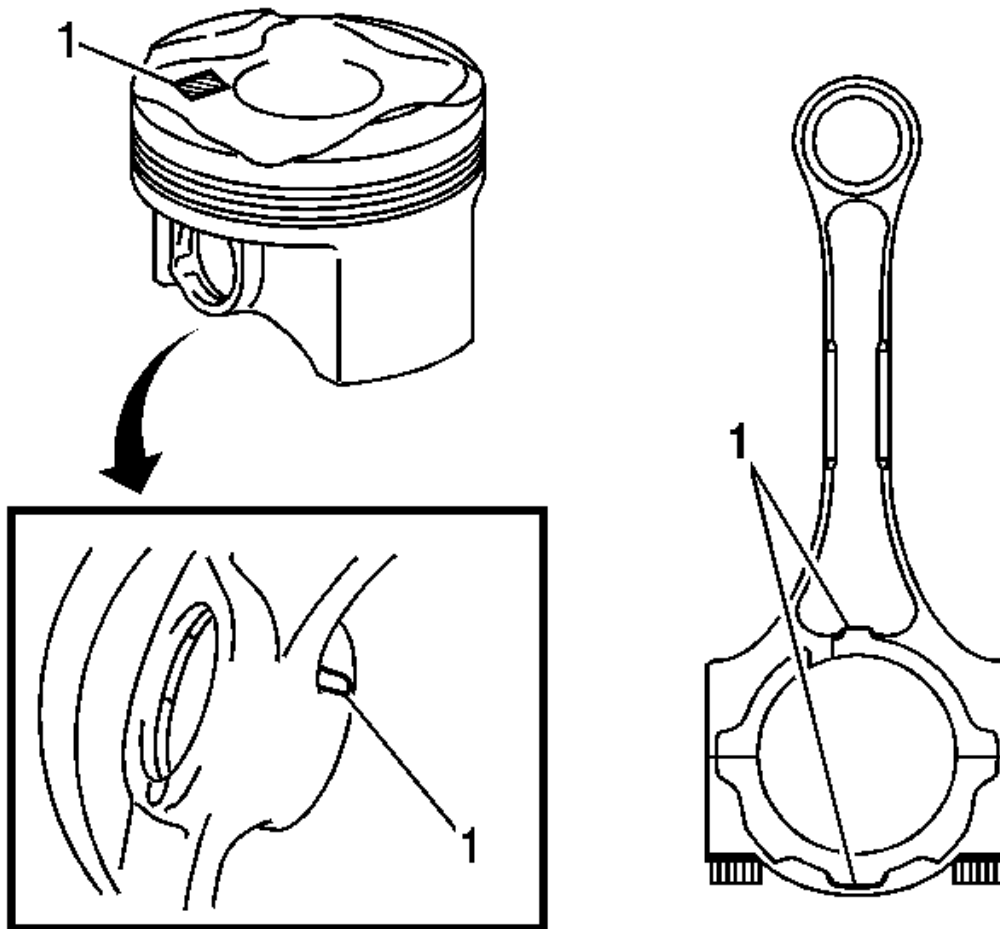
Aligning Front Marks Of Piston & Connecting Rod
